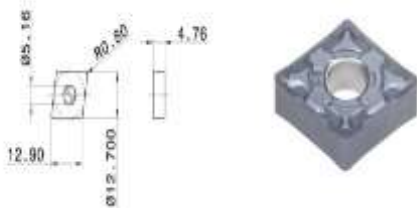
CNMG 120408-HRM AH8005 cutting tool insert
